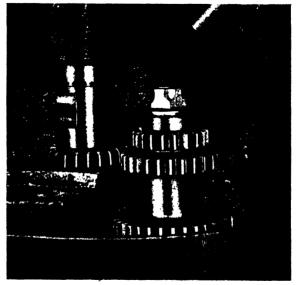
Gear Shaping by Means of Pinion-type Cutter in the D.B.S. Works
